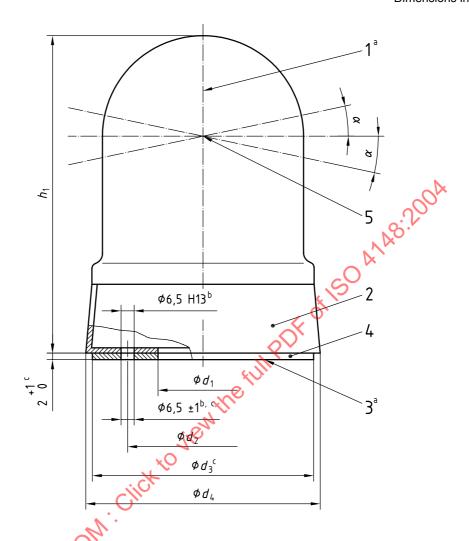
Tube-mounted special warning lamp (category A) — Mounting tube and acceptor dimensions
